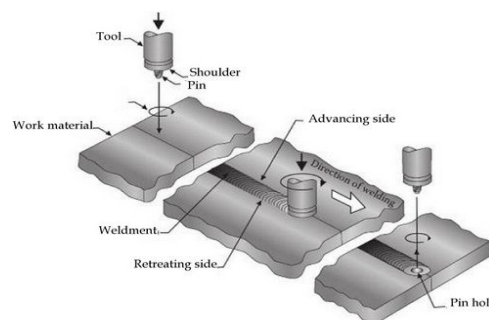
Schematic diagram of friction stir welding process [2]
